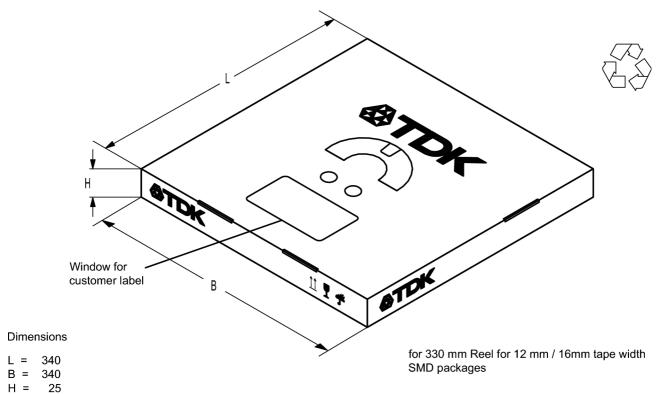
Drawing of folding box for reel with diameter of 330 mm.
